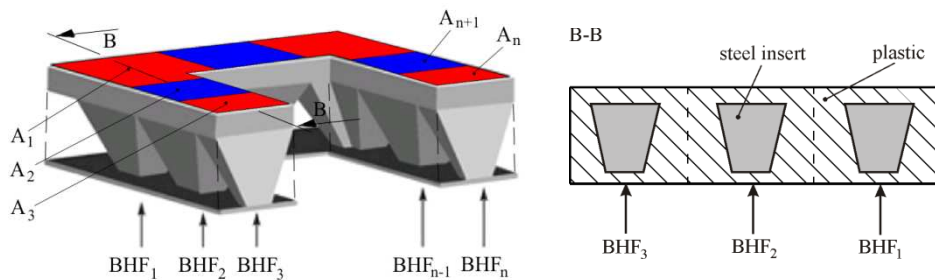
Multi-point blankholder, where: A_1 - A_3 – flat surfaces, BHF (1- n) blankholder forces
